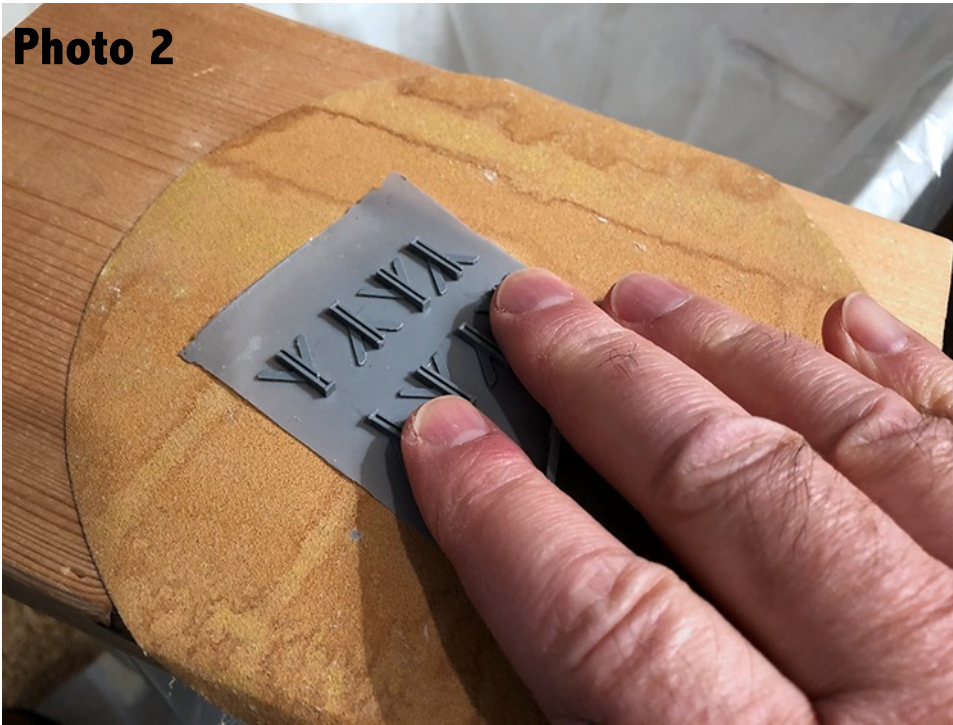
The resin sheet with parts attached is placed on a flat disk of abrasive and swirled to sand off the resin backing and free the parts. The sanding disk is glued to a piece of wood as a backing for the work.
